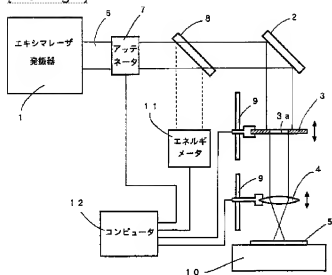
The figure with which explanation of the method of forming a slot in a machining object by excimer laser processing is presented.
